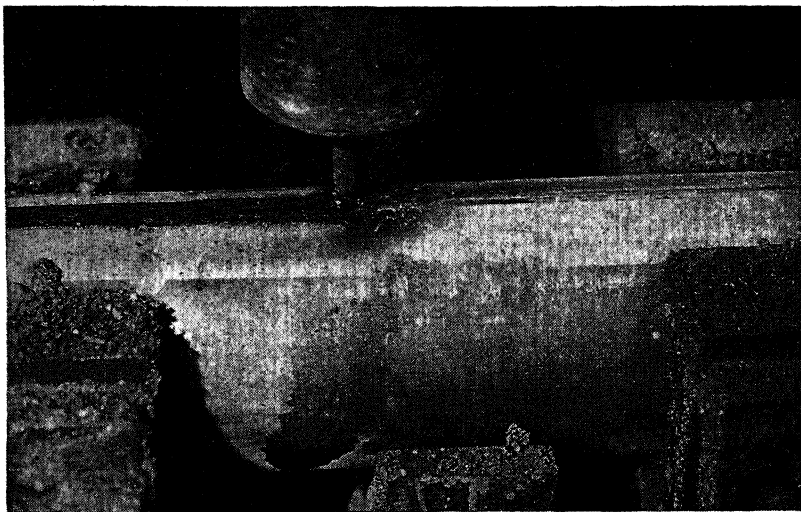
Closeup of weld in rear axle housing produced by automatic carbon arc.
